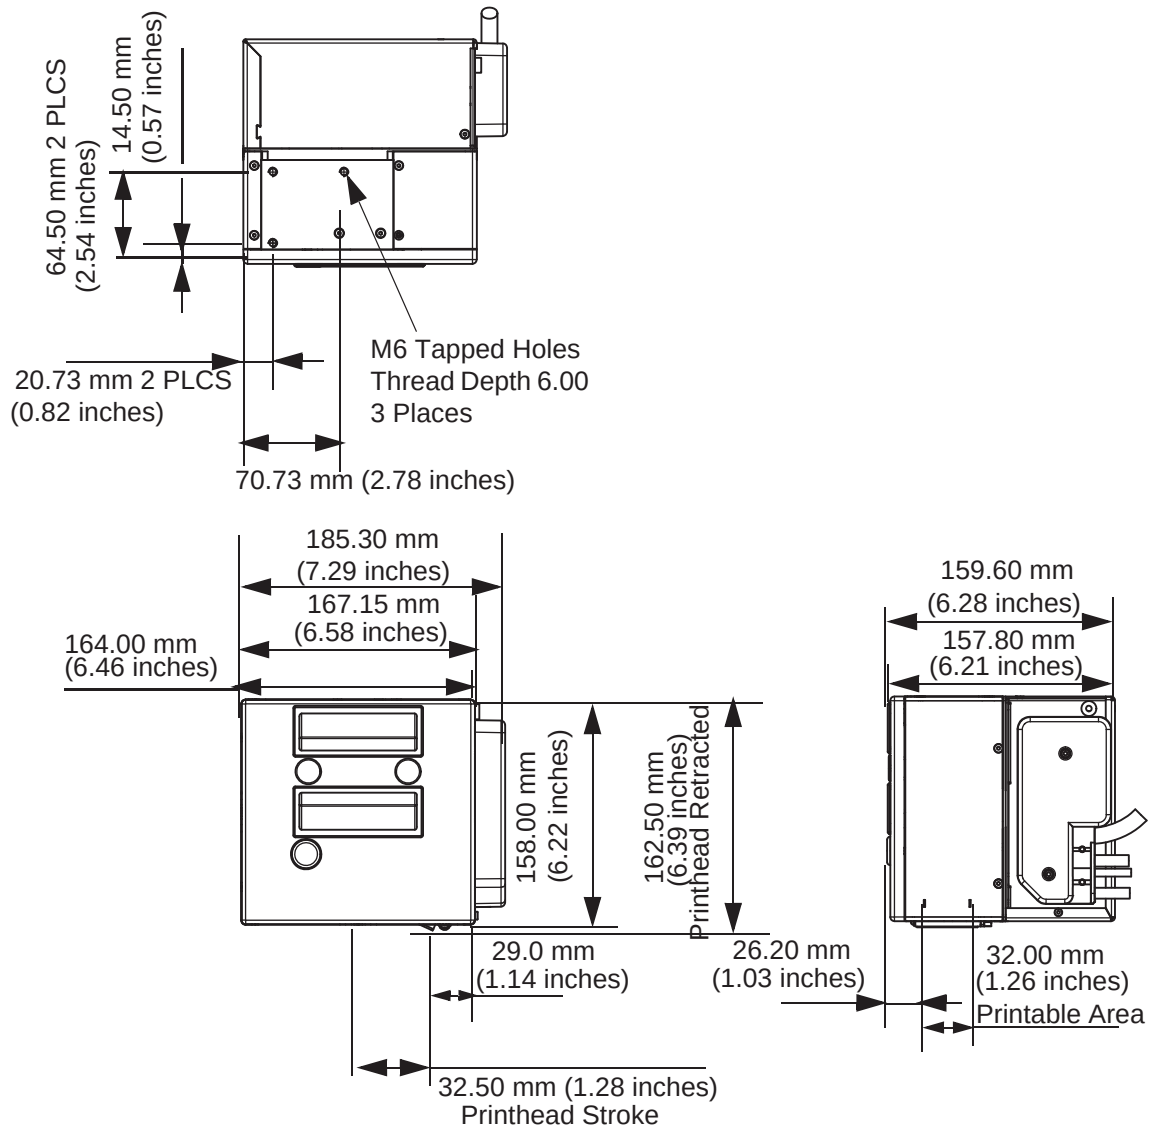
Videojet 6210 30 mm LH Printer Dimensions
